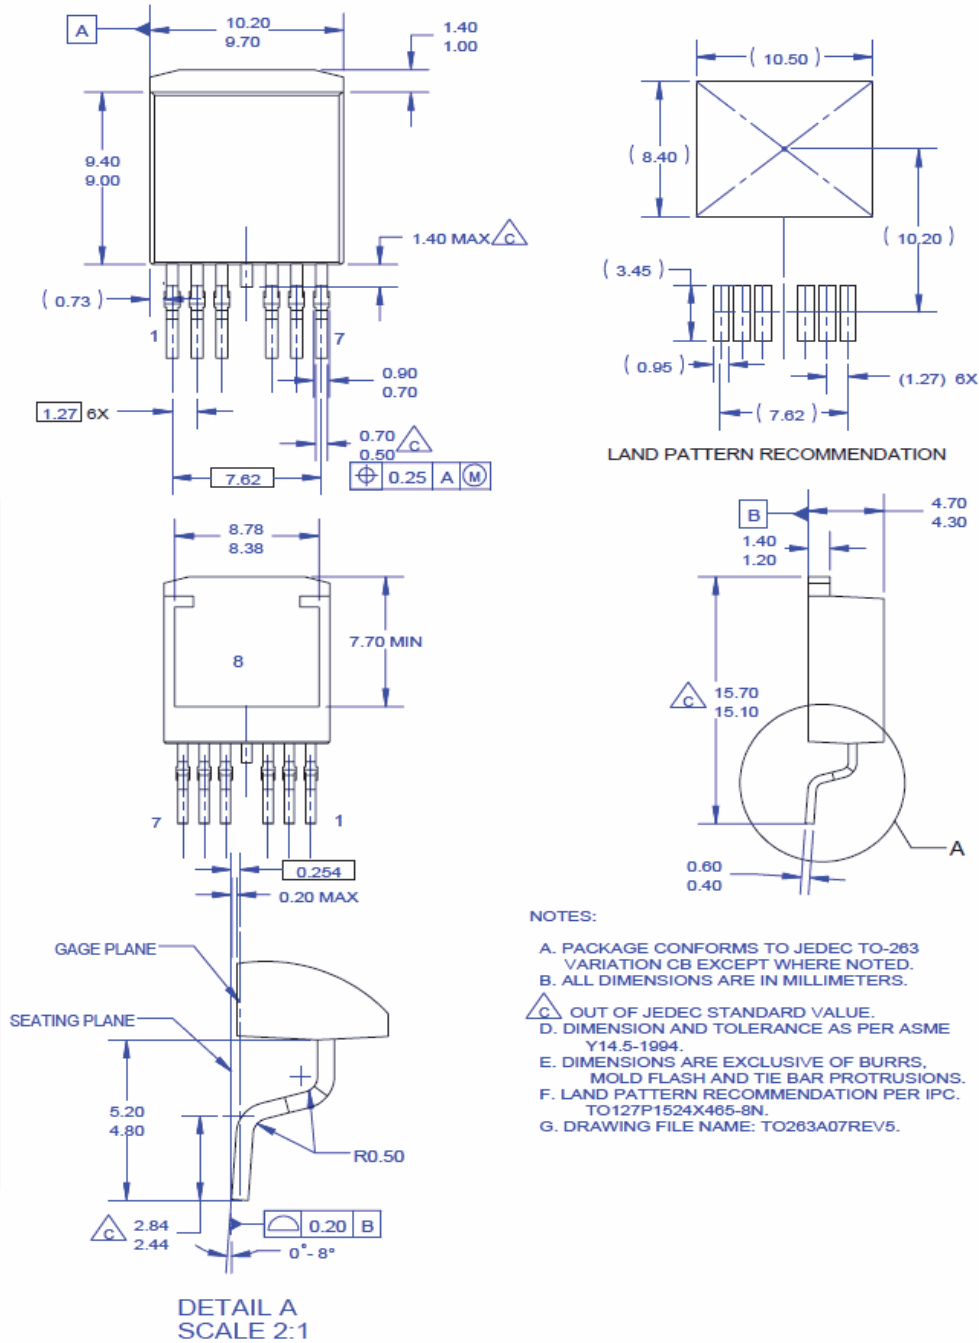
TO263 (D²PAK), Molded, 7-Lead, Surface Mount
